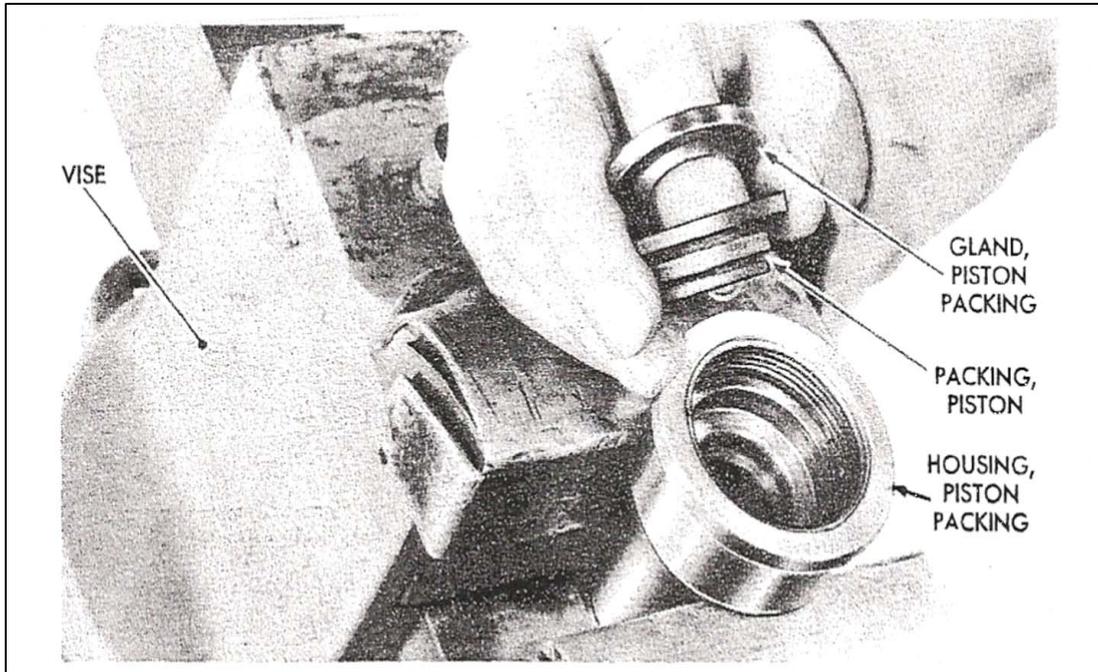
Close-up view of assembly with packing.<sup>1</sup>
